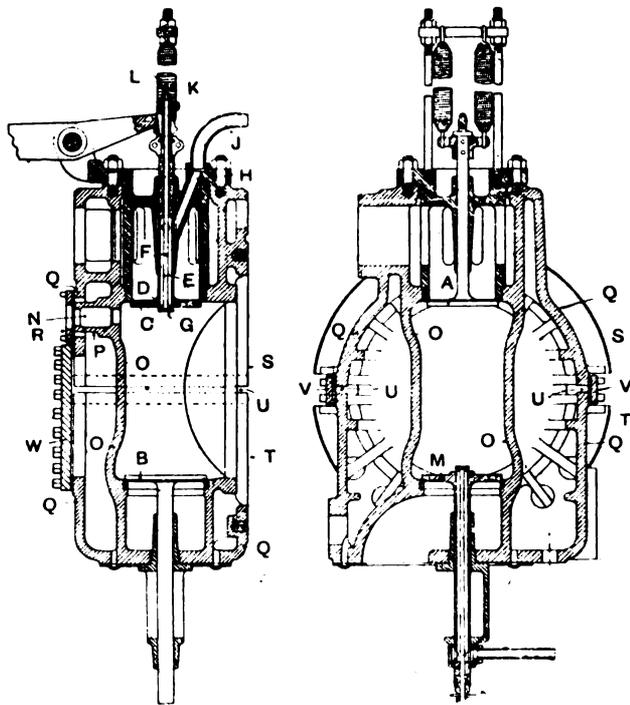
Combustion Chamber, Hornsby-Stockport.
